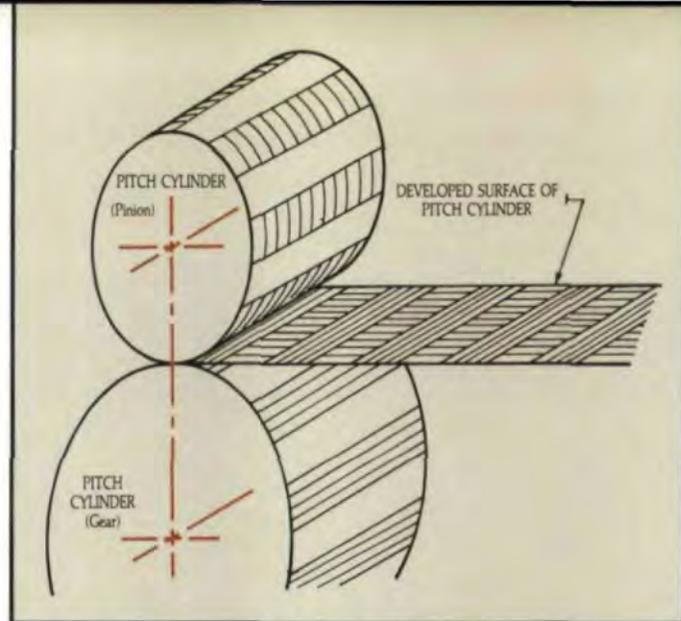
Developed surface of pitch cylinders containing cross sections of the meshing teeth.
